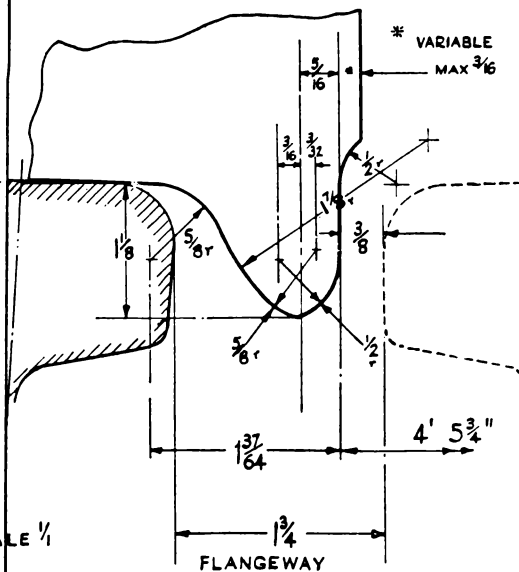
shows full-size wheel and tyre dimensions with particular regard to flanges. It will be seen that bogie and trailing wheels have thicker flanges than driving wheels, and it will also show how near the BMRSB has got to scaling down full size dimensions. The purpose in studying this drawing is to show the importance of the radius between the flange and tread. If there is no radius here in the model there will be frequent derailments. A study of the old standards (fig. 4) will repay the reader when he sees the generous radius given to the flange for running on tinplate track which had a round head to the rail. It was almost impossible to derail these early
